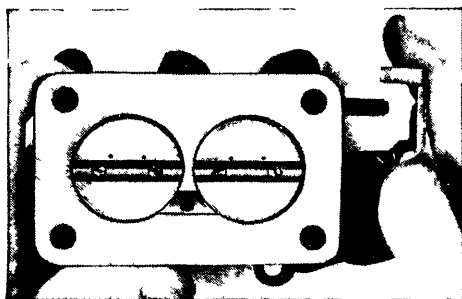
Assemble throttle stem and valves (see instructions in text). Then seat needle valves lightly with fingers and turn in full turn off seat
